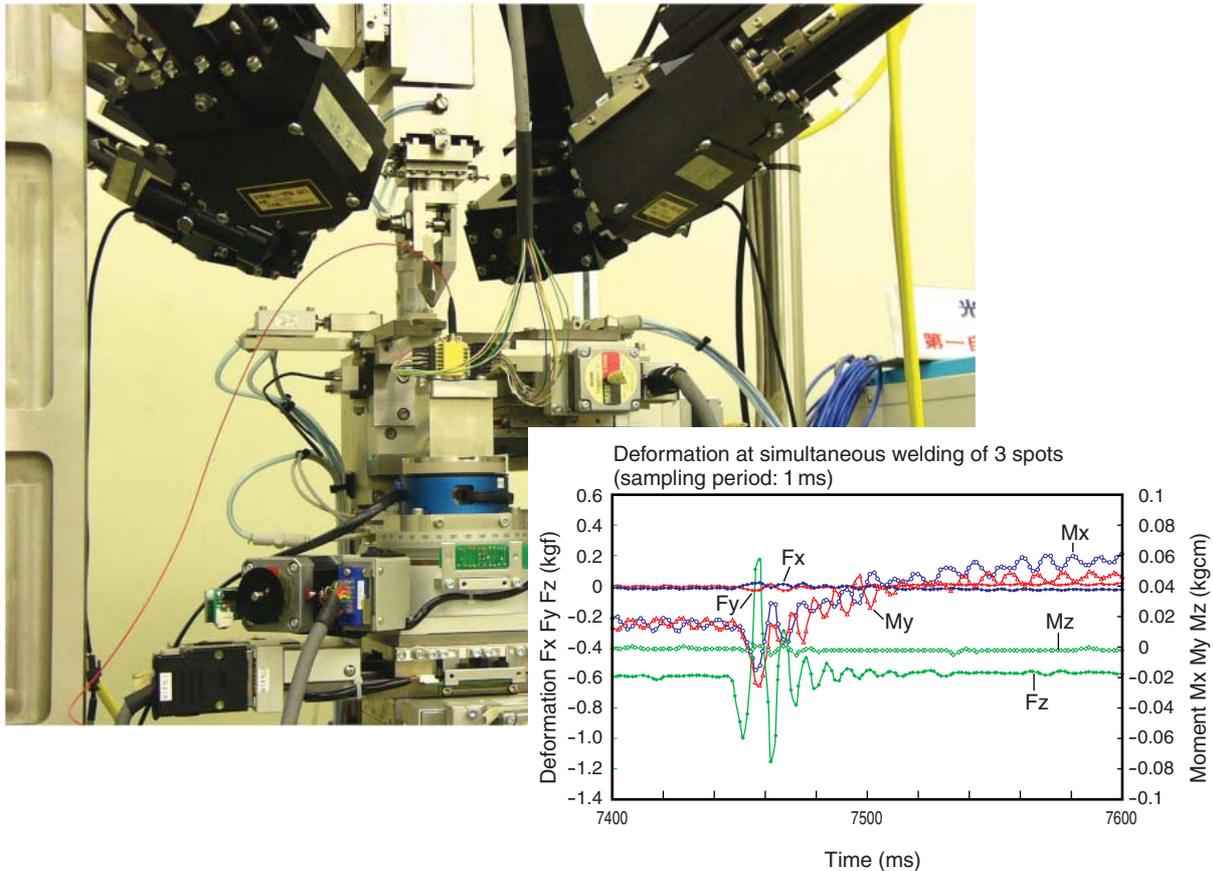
In-process monitoring of deformation at laser welding.
